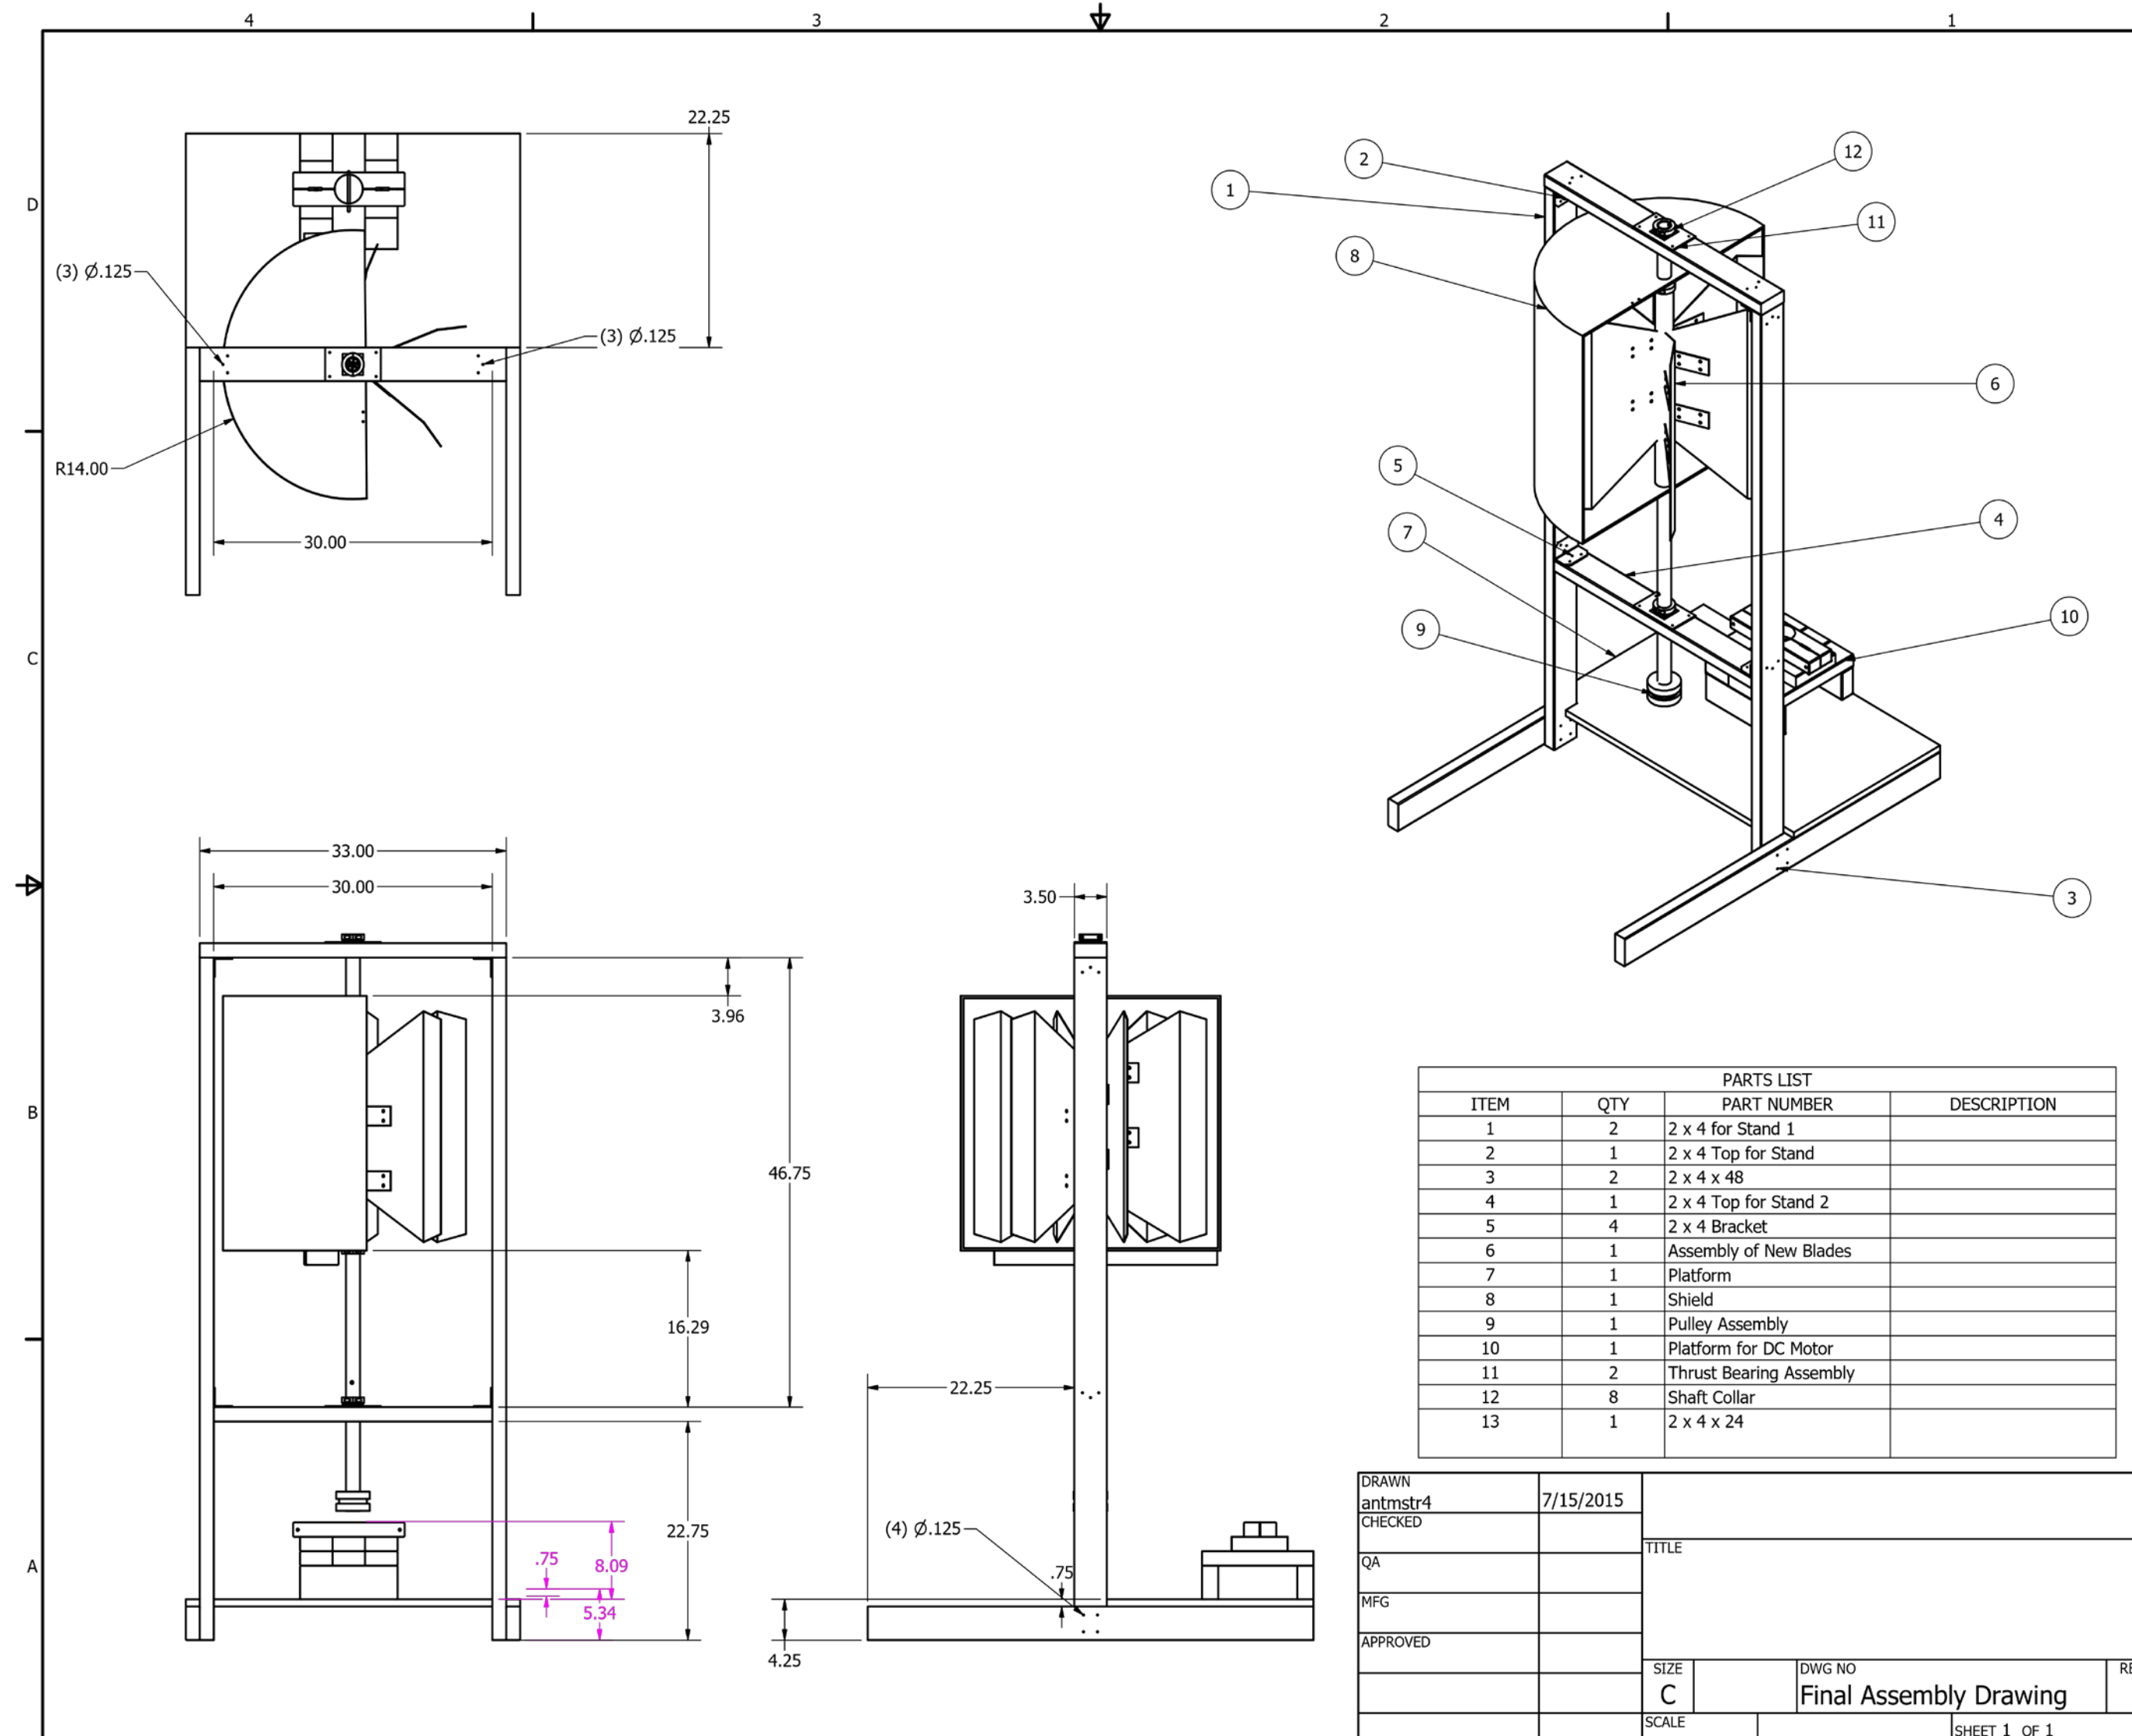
Mechanical Drawing of the Final Assembly of the Turbine and Shield; all dimensions are in inches.
